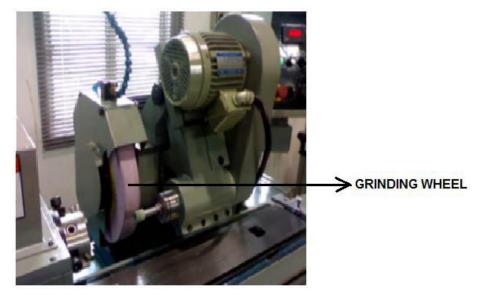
The Grinding Wheel Head on cylindrical grinding machine Source: GTDMC Machining *EXTOMAX* (OCD-3260)
